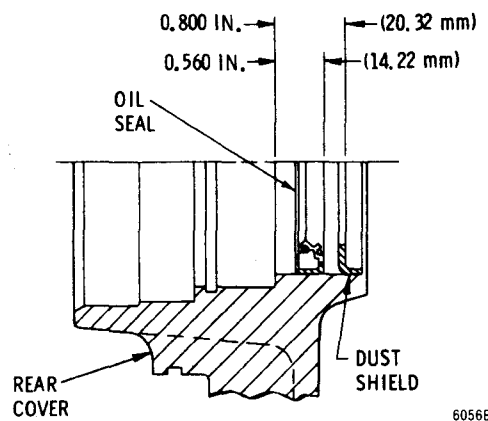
Oil and dust shield installation (TTB with converter-driven PTO)
